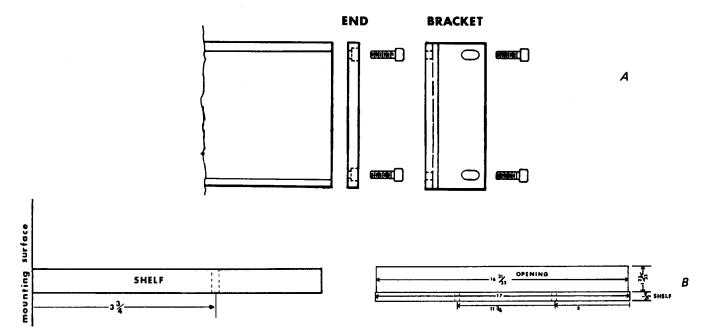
INSTALLATION OF END BAR ACCESSORIES AND SHELF-MOUNTING DETAILS
